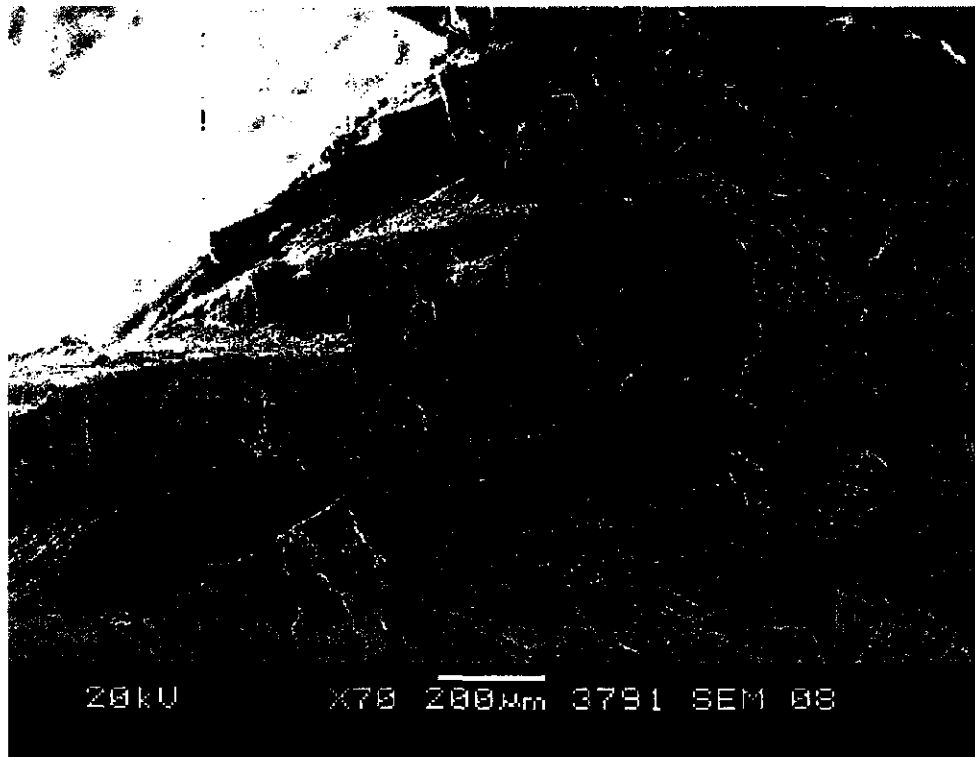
Fracture produced in lab by opening crack in tenon. Note secondary cracking at top edge of picture
